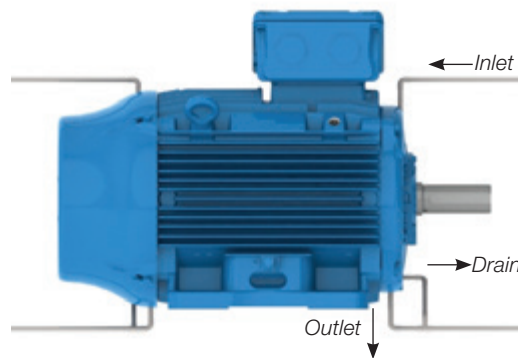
Oil supply and drain system of oil lubricated or oil mist lubricated motors
